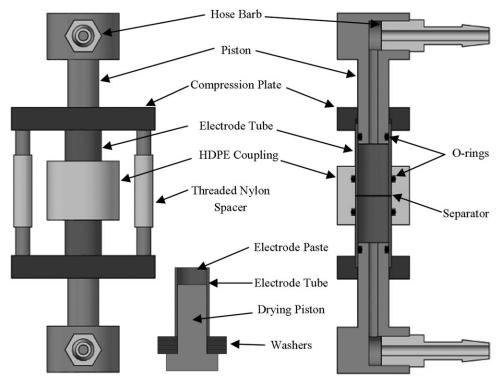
Schematic of the test cell for the convection battery and drying piston; front view (left), rotated cutaway view (right), and cutaway view of the drying piston (center).
